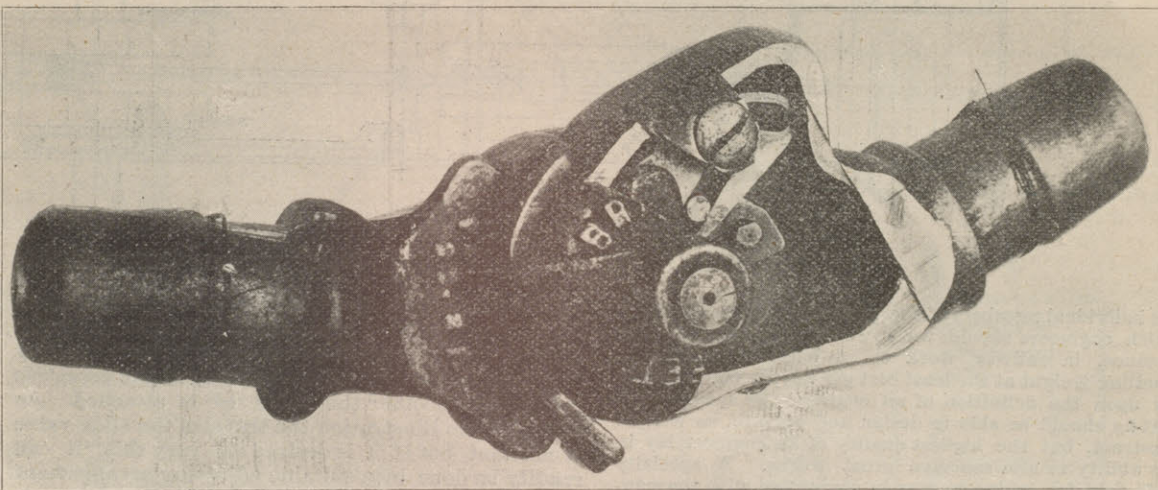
COUPLINGS SHOWN TOGETHER.
